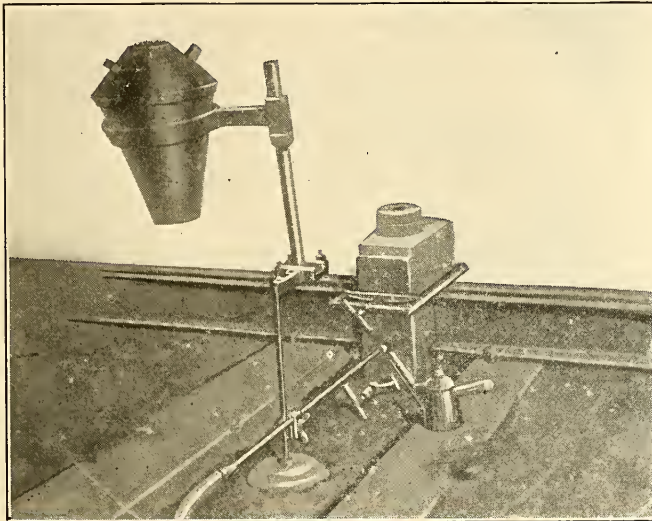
Mold and Crucible Clamped in Position Ready for Preheating. Box Containing Additions Set in Riser of Mold.
